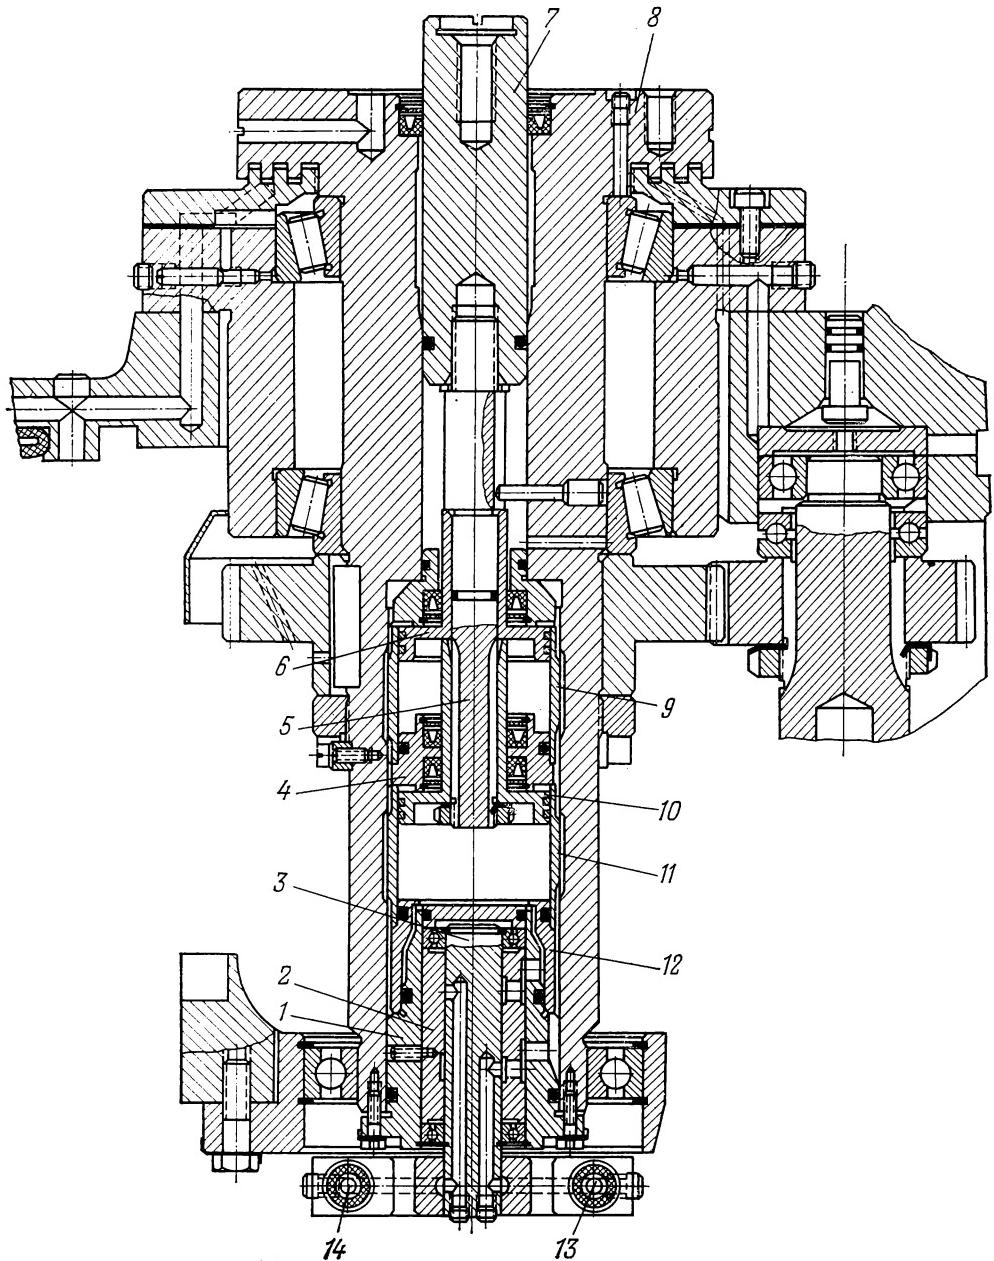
Hydraulically operated chucking device of the model 1K282 vertical semiautomatic chucking machine
